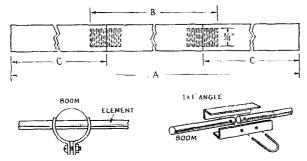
Details of the portable 6-2 array. In the upper drawing, Dimension A is the length of the 50-Mc. element. Dimension B is the length of the center portion that acts as a 144-Mc. element, including one-half inch of the threaded insert at each cud. Dimension C is the length of the element extension that converts an element from 144 to 50 Mc. Figures for these dimensions for the various elements are given in Table I.
